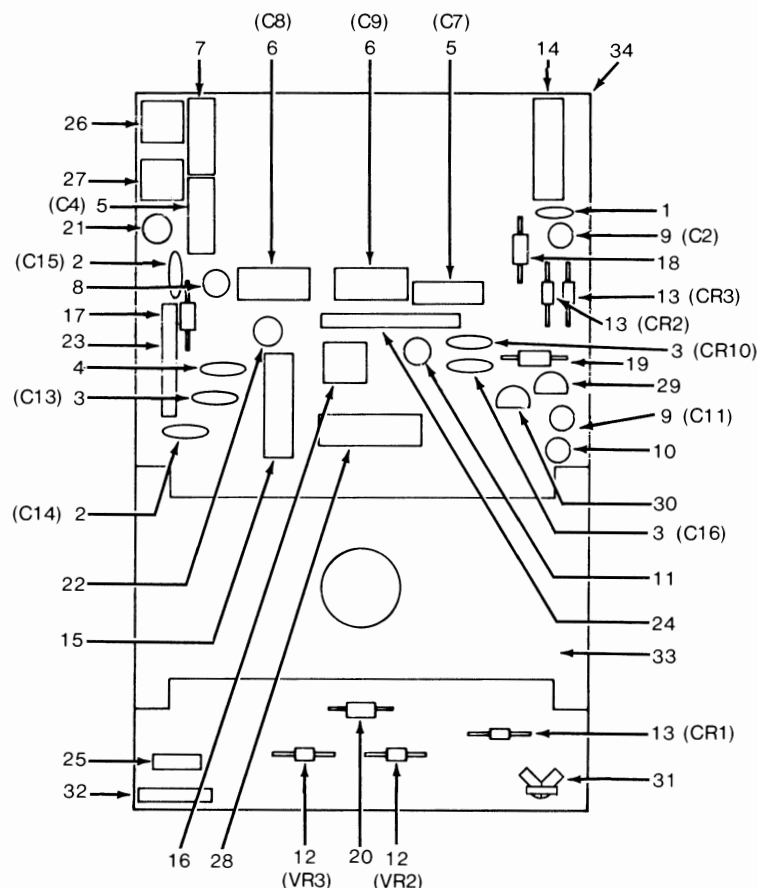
Large Circuit Board Assembly (RMS 3030 and TECH 330) for Part Location
